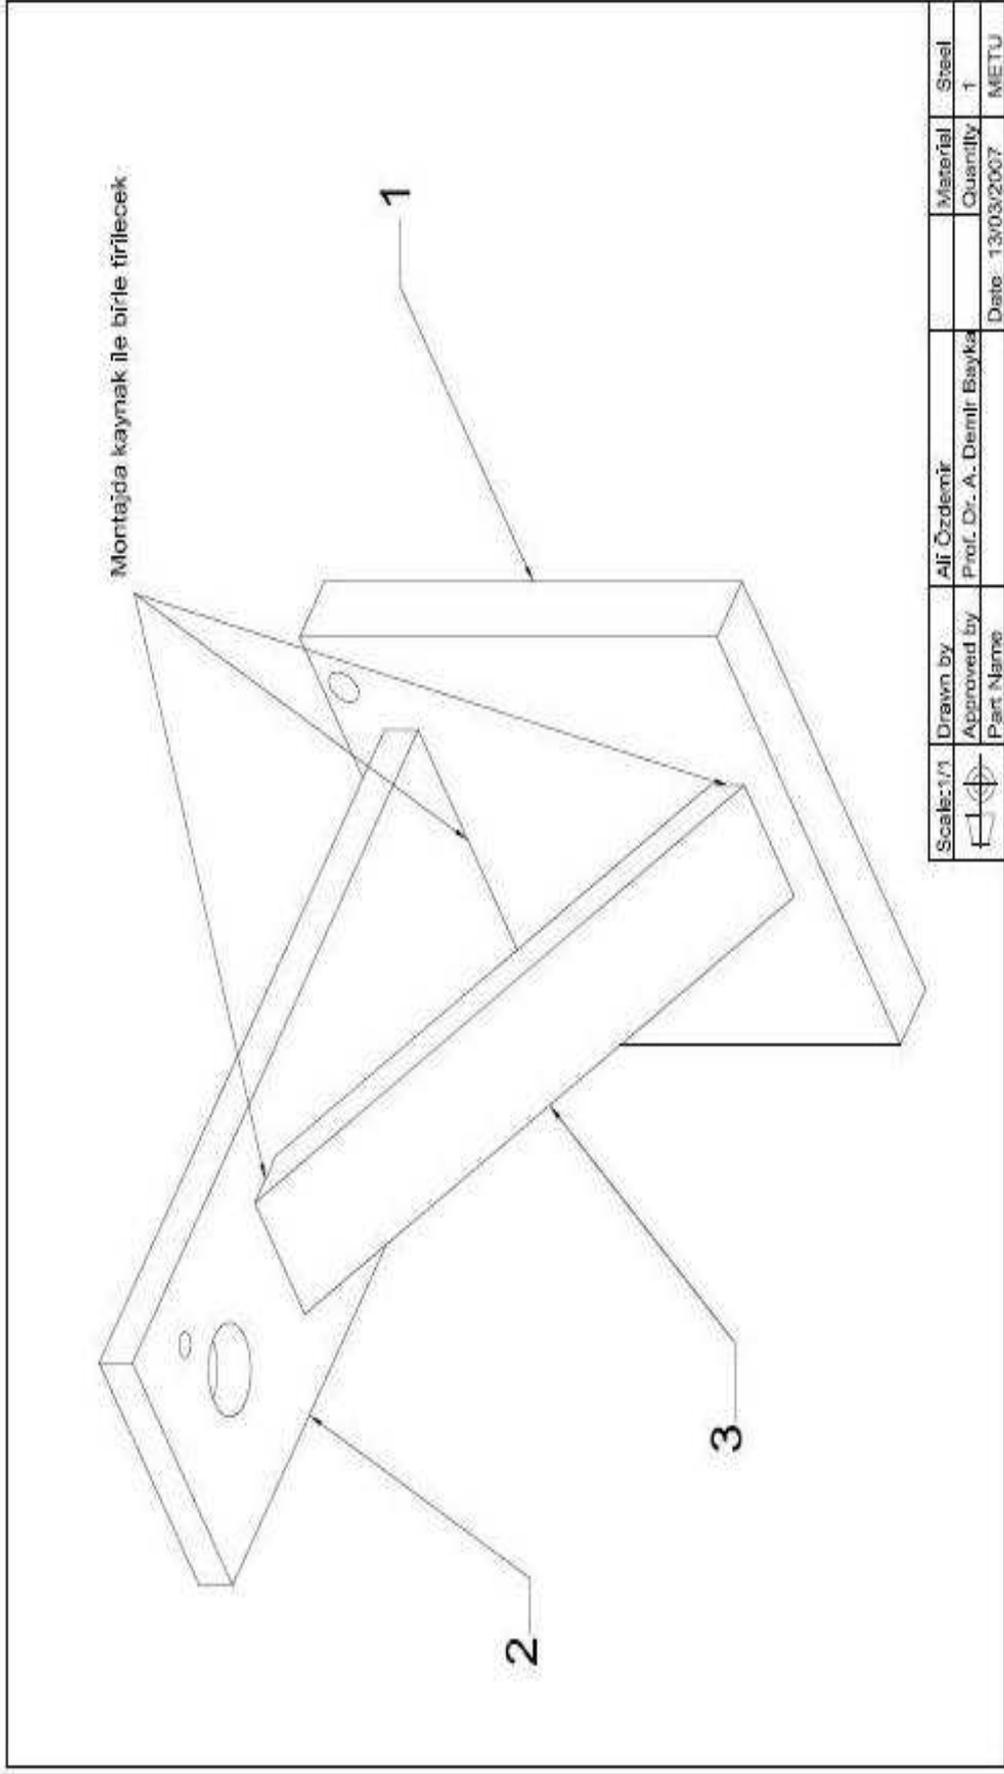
Assembly Drawing of the Engine Speed Sensor Holder
